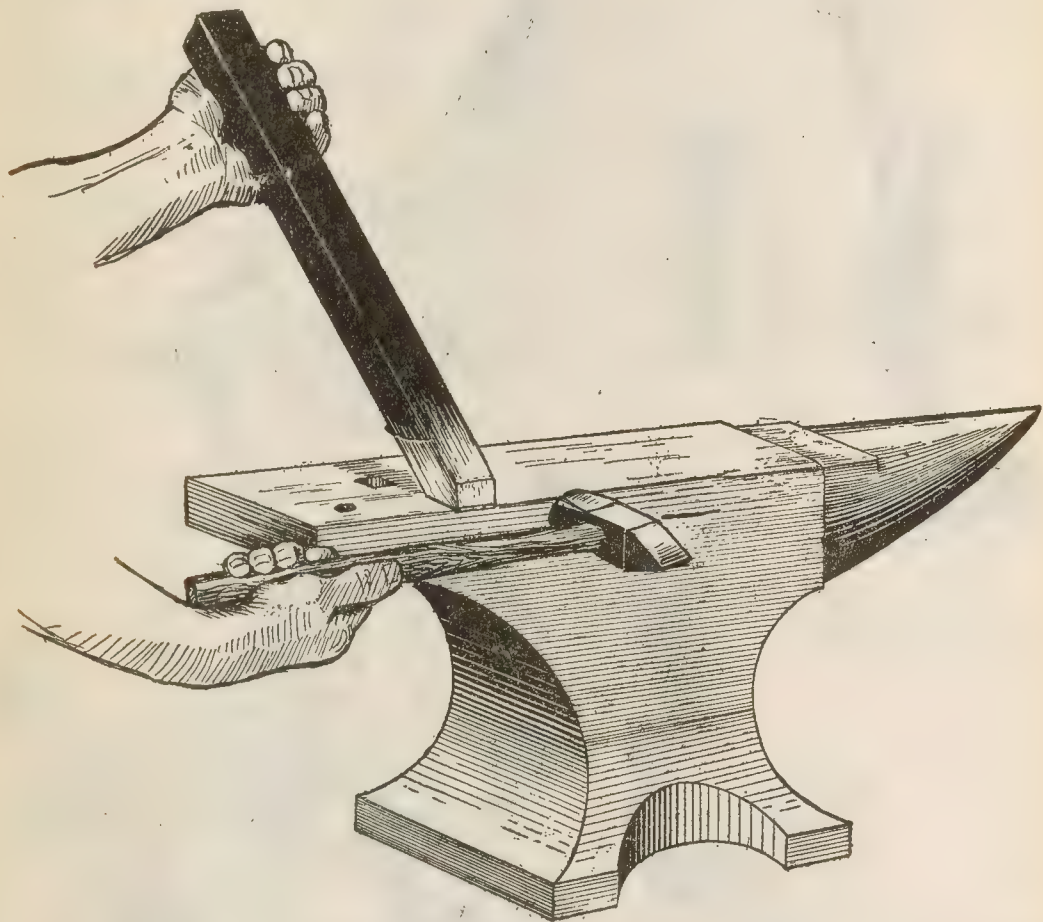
,957.—*Drawing 3.* Forming a chamfer or short taper. Place a piece on anvil and hold at half the angle of the taper. In order to avoid striking the anvil the end of the piece to be chamfered should be held flush with the edge of the anvil. The drawing should take place at a high temperature.
